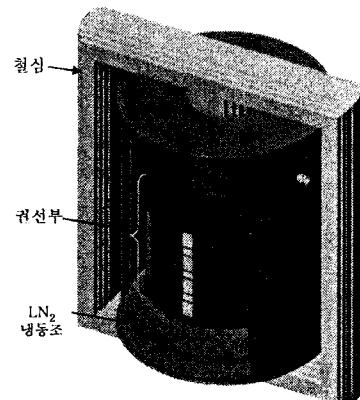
Design of a single phase 1MVA 22.9kV/6.6kV HTS transformer with double pancake windings.
